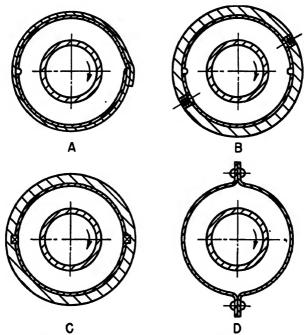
A Torsilastic rubber spring may have its outer shell split into two 180-degree segments. These are pressed into a housing to assemble the spring. Methods of locking the spring in its housing include (A) a tangential tongue, (B) hollow-head set screws, and (C) locking keys. The flanged split shell in (D) requires no housing.
